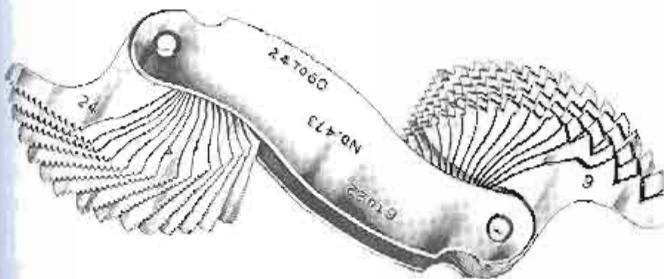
Thread pitch gages. (Courtesy of L.S. Starrett Company.)
